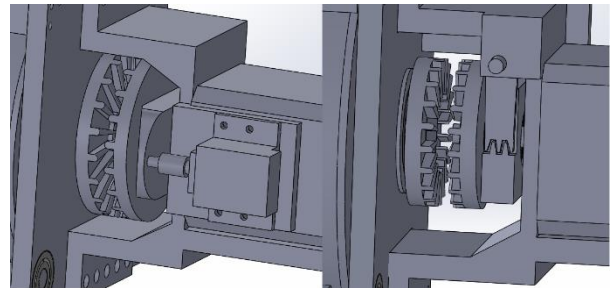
The Two Preliminary Designs for the Clutch Mechanism
